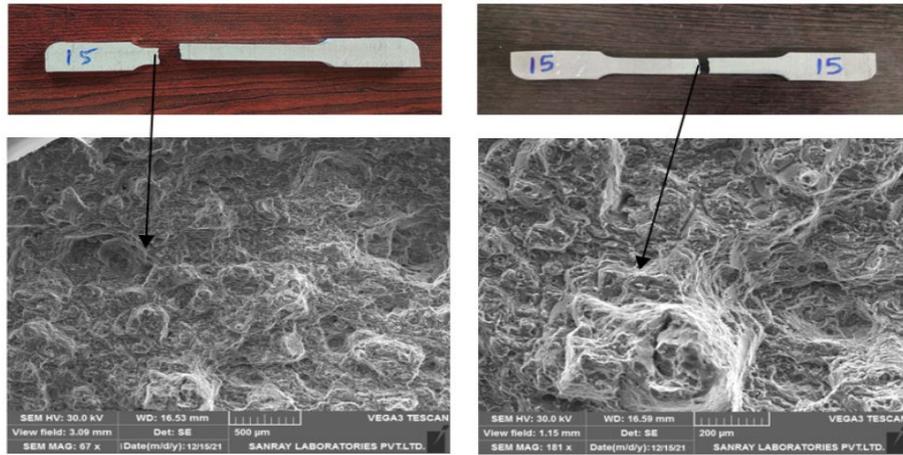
Casted AA2195-B₄C-Gr MMCs and Hot Rolled HT AA2195-B₄C-Gr MMCs and tensile fractured surfaces SEM images Casted & Hot Rolled aging AA2195-B₄C-Graphite MMCs
